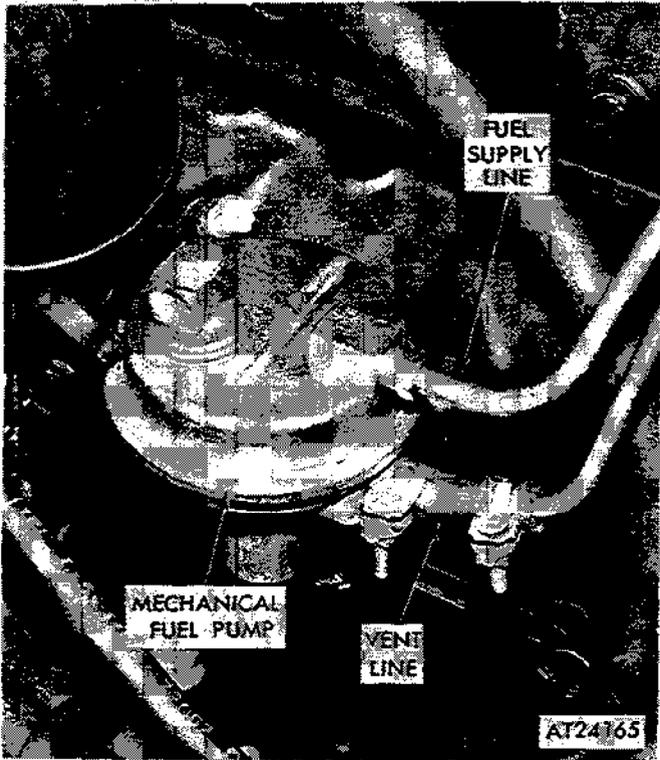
Removing or installing mechanical fuel pump (M151A2, M825, and M718A1 vehicles).
